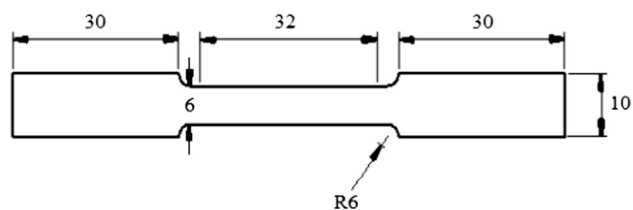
Shape and dimensions of tensile test specimen. All dimensions are in mm
